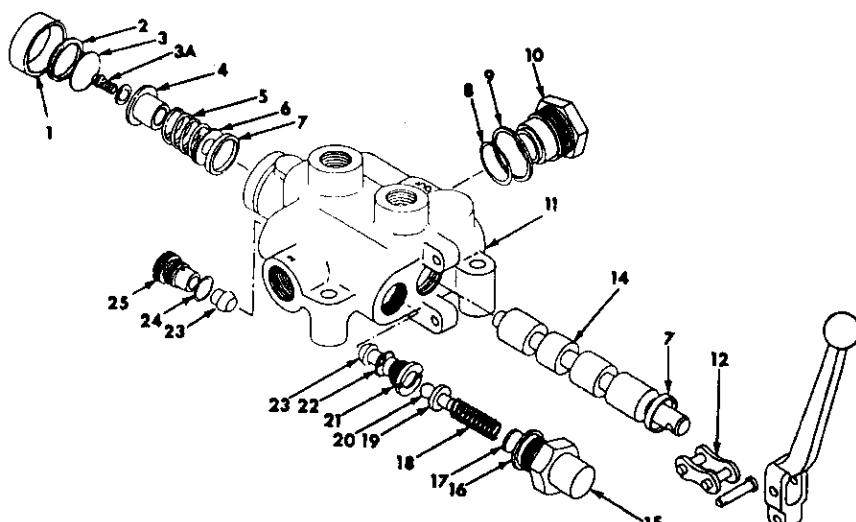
Exploded view of the remote control valve which can be mounted on the scuttle plate (lower instrument panel) on Series B-275 and early Series B-414 tractors.
